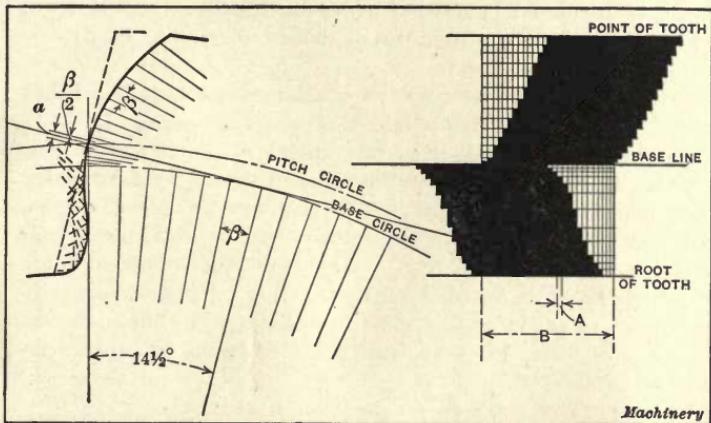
Relative Width and Position of Flats produced by Gear Hobbing Machines. A indicates Feed per Each Generating Tooth; B, Feed per Revolution of Blank
